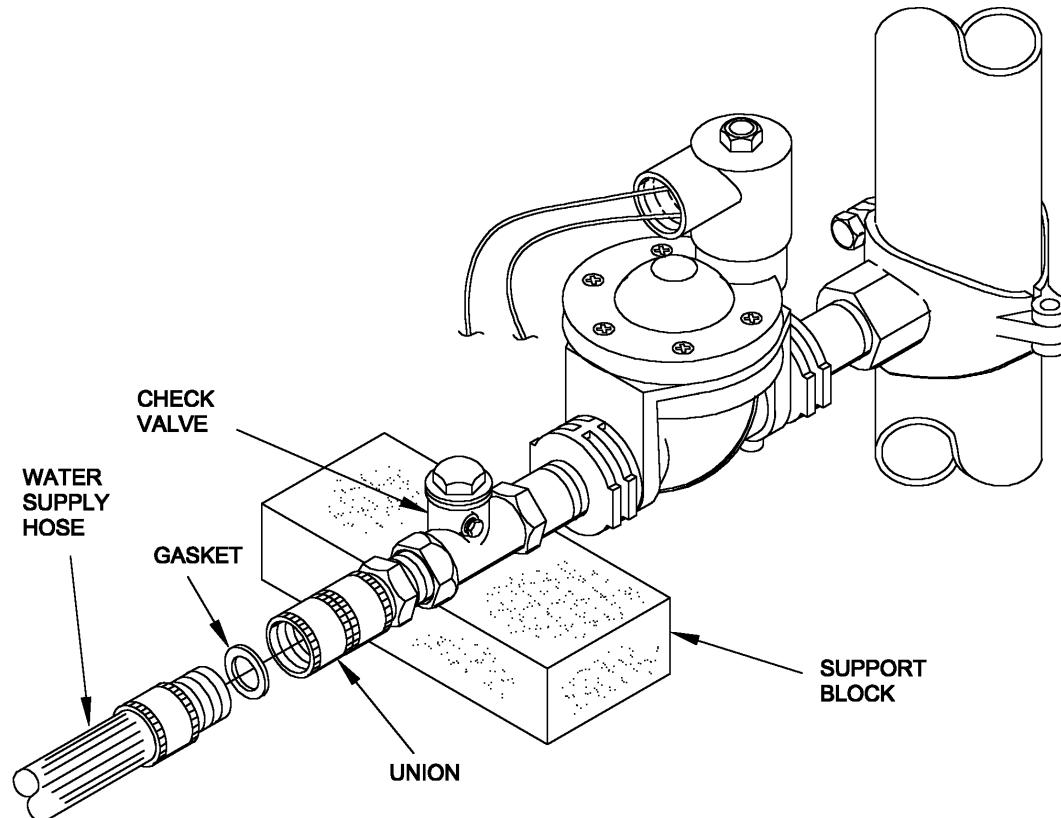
Connecting Water Supply and Supporting Solenoid Valve Assembly
